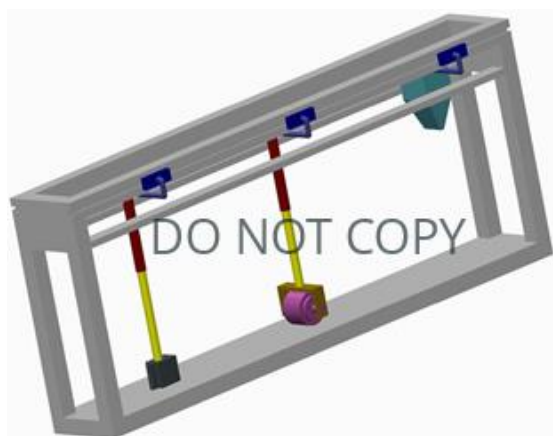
Assembled CAD drawing of the concept proposed for design #2.
